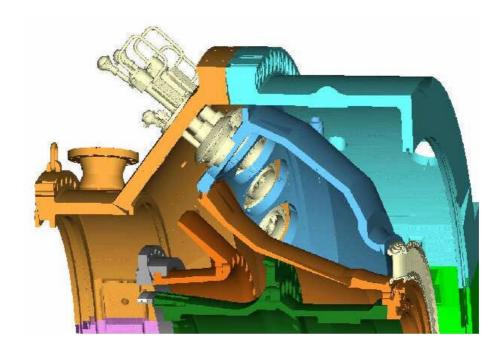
Examples of a fuel injector and a ring shaped combustion chambers (Alstom, Siemens)
